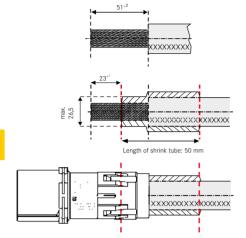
Shrink tube assembly over the cable for Han® HC Modular 650
